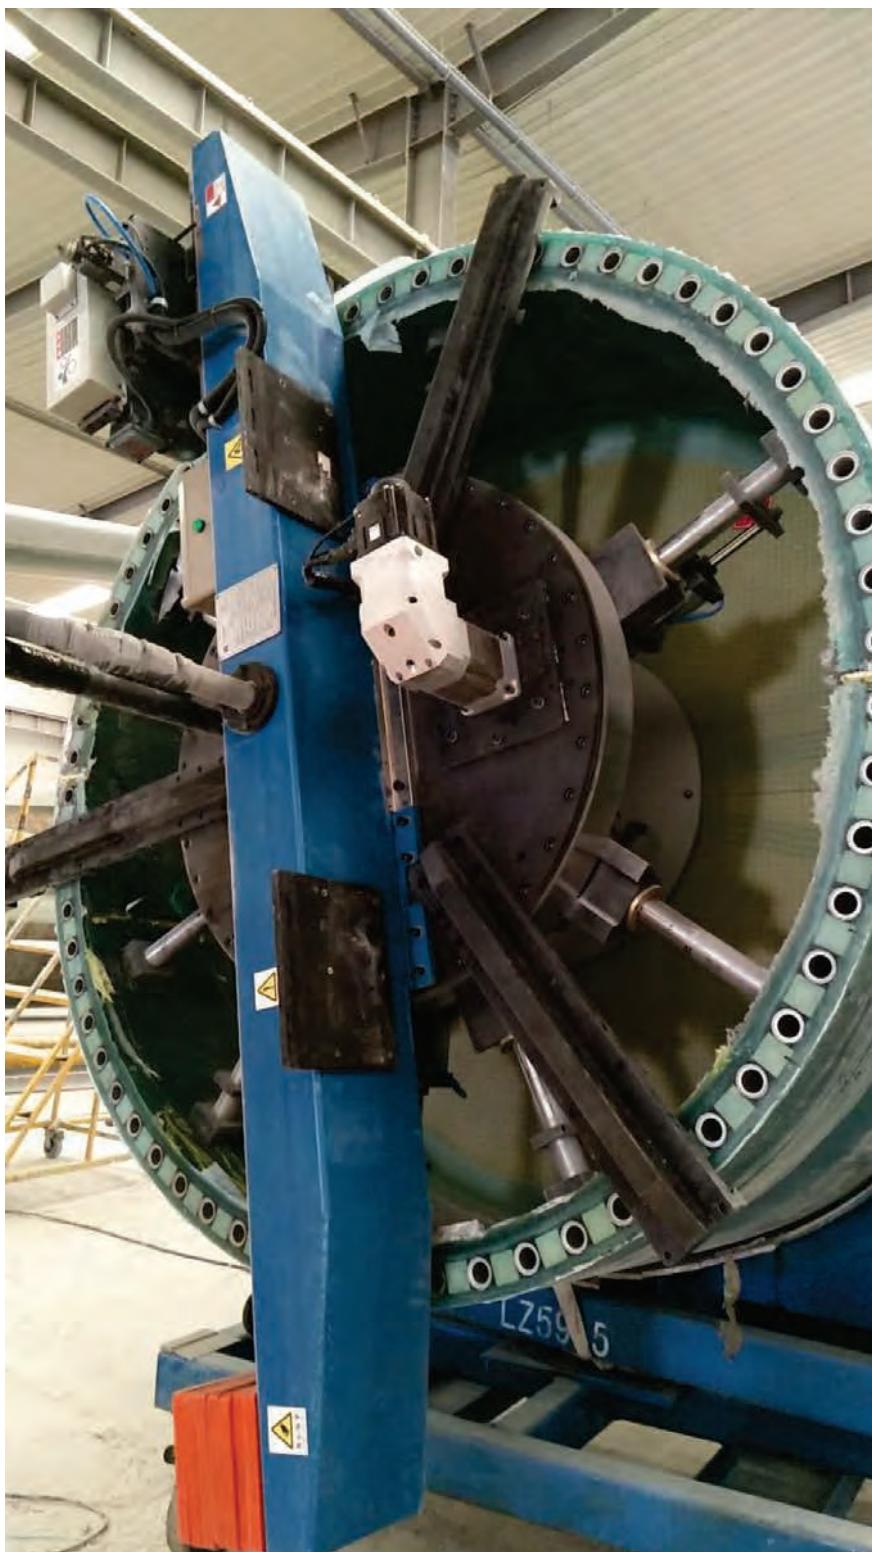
end face milling machine processing (embedded bolt sleeve blade root processing)
